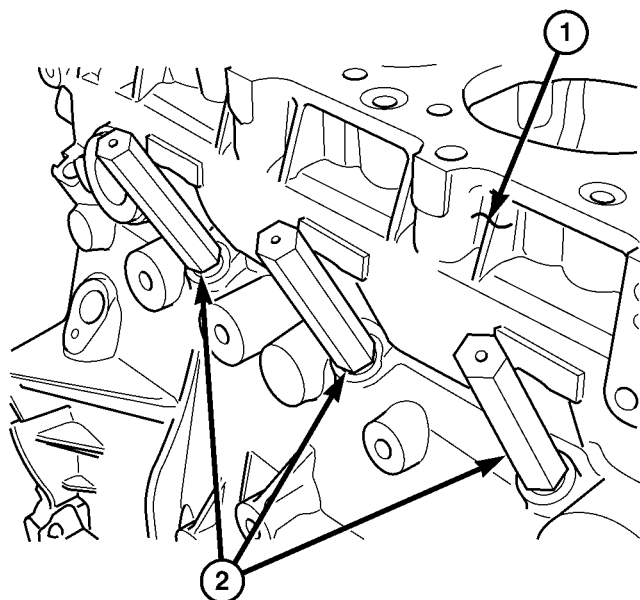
CRANKSHAFT SUPPORT ALIGNMENT
